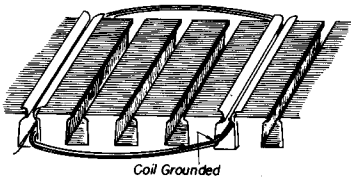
The coil may contact the iron core due to torn or improperly cut slot insulation.
